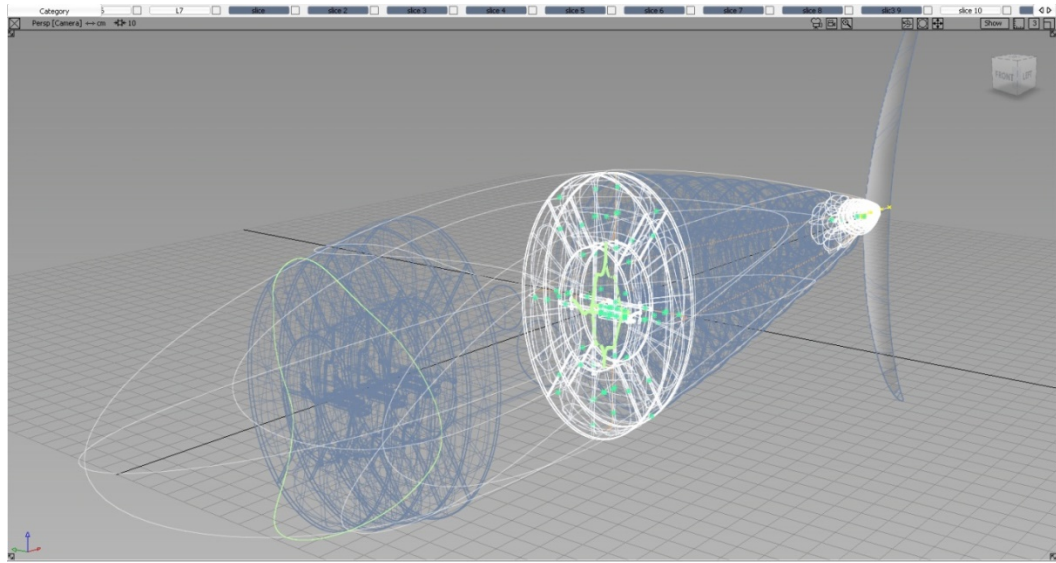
Hydraulic Pressure Feed Pocket Drive System - Front profile view.
